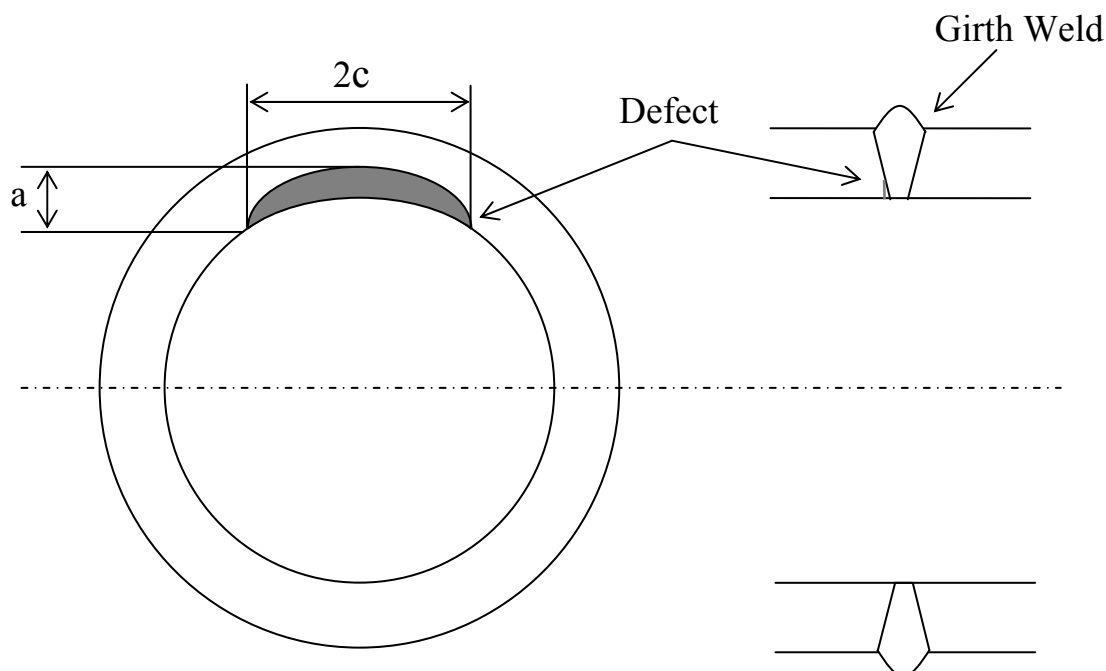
Defect orientation relative to steel catenary riser; circumferential internal surface breaking flaw located at a girth weld.
